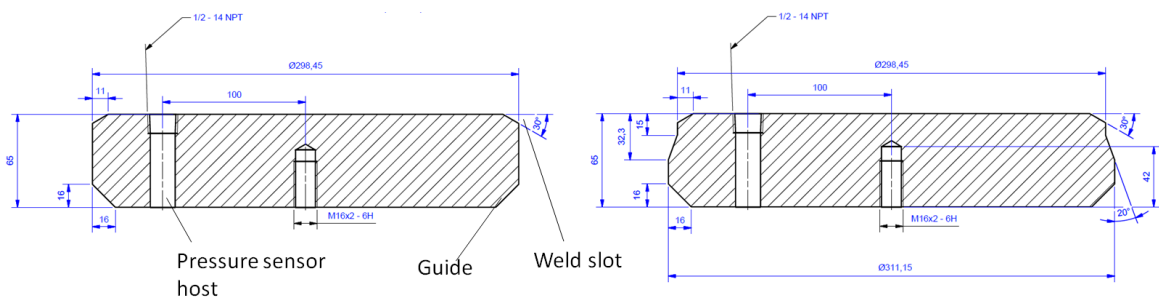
The cones, flush (left), and coned (right) technical drawings by Koen Castelein, assistant research engineer.
